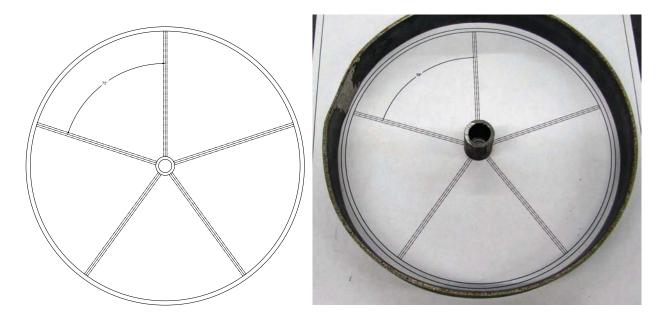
a) Small wheel spoke pattern. b) Small wheel ring and wheel axle support centered on the paper pattern.
